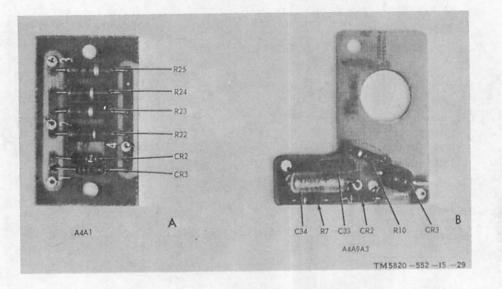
Parts locations, antenna indicator assembly A4A1, and oscillator control assembly A4A9A3.
